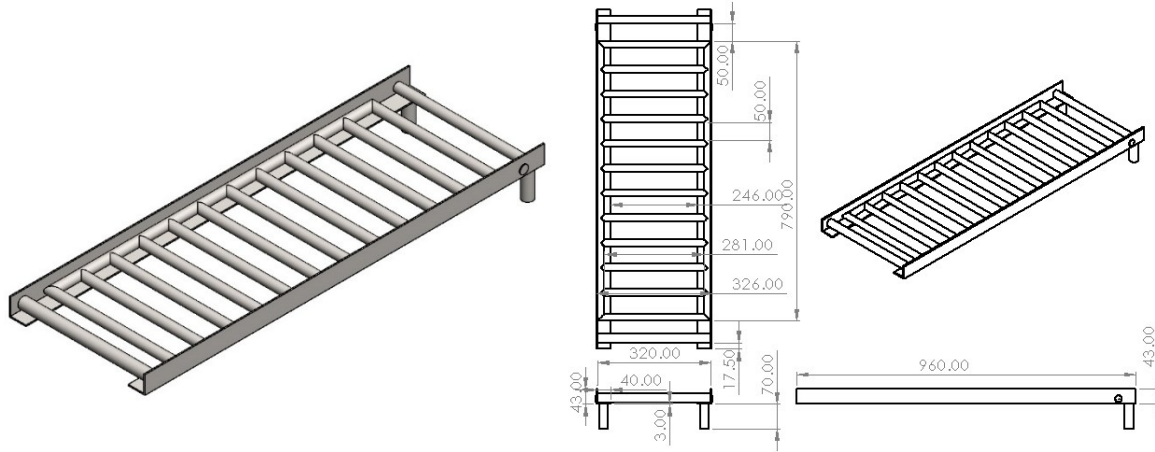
Entry Wood Carrier Frame with their dimensions of Cylindrical Cook-Stove Model.
